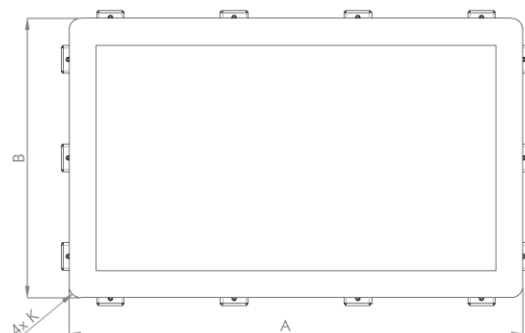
Dimensions Open Frame Cutout Front- and Spacerplate
